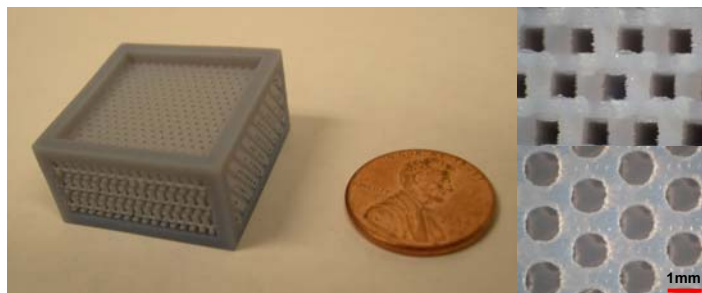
Photographs of the fabricated polymer Johnson EBG structure, including: the full view (left), the side (cross-sectional) view (upper right), and the top view (lower right). Clearly defined air hole and dielectric rod layers are observed.
